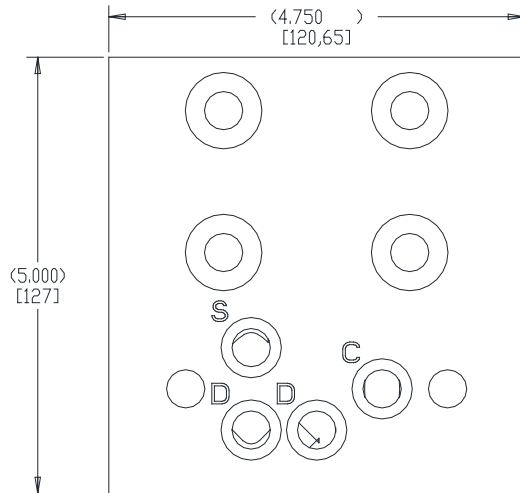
Hydraulic Manifold Block to Adapter Manifold Interface
